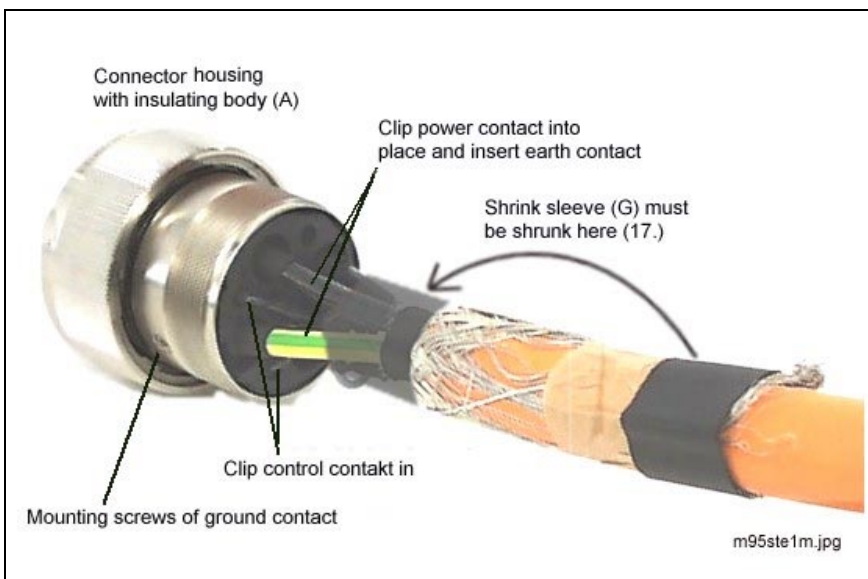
Fitting insulation body INS0381, -0382, -0386
